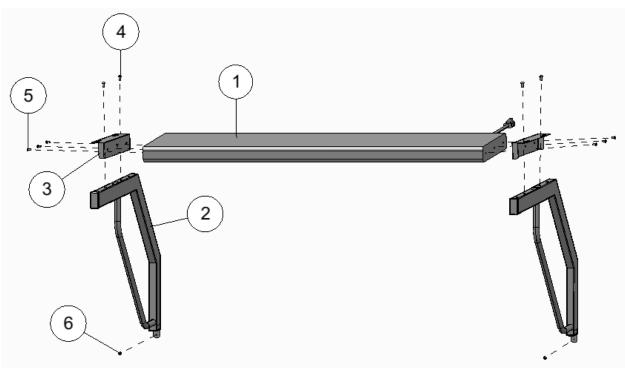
shows the components comprising the Overhead Lighting assembly. As illustrated, the assembly consists of the Overhead Light (1), two Support Brackets (2), two Mounting Spacers (3), and the hardware Screws (4, 5 and 6), used for interconnecting the components together and for fastening the unit to the TechOrganizer.
